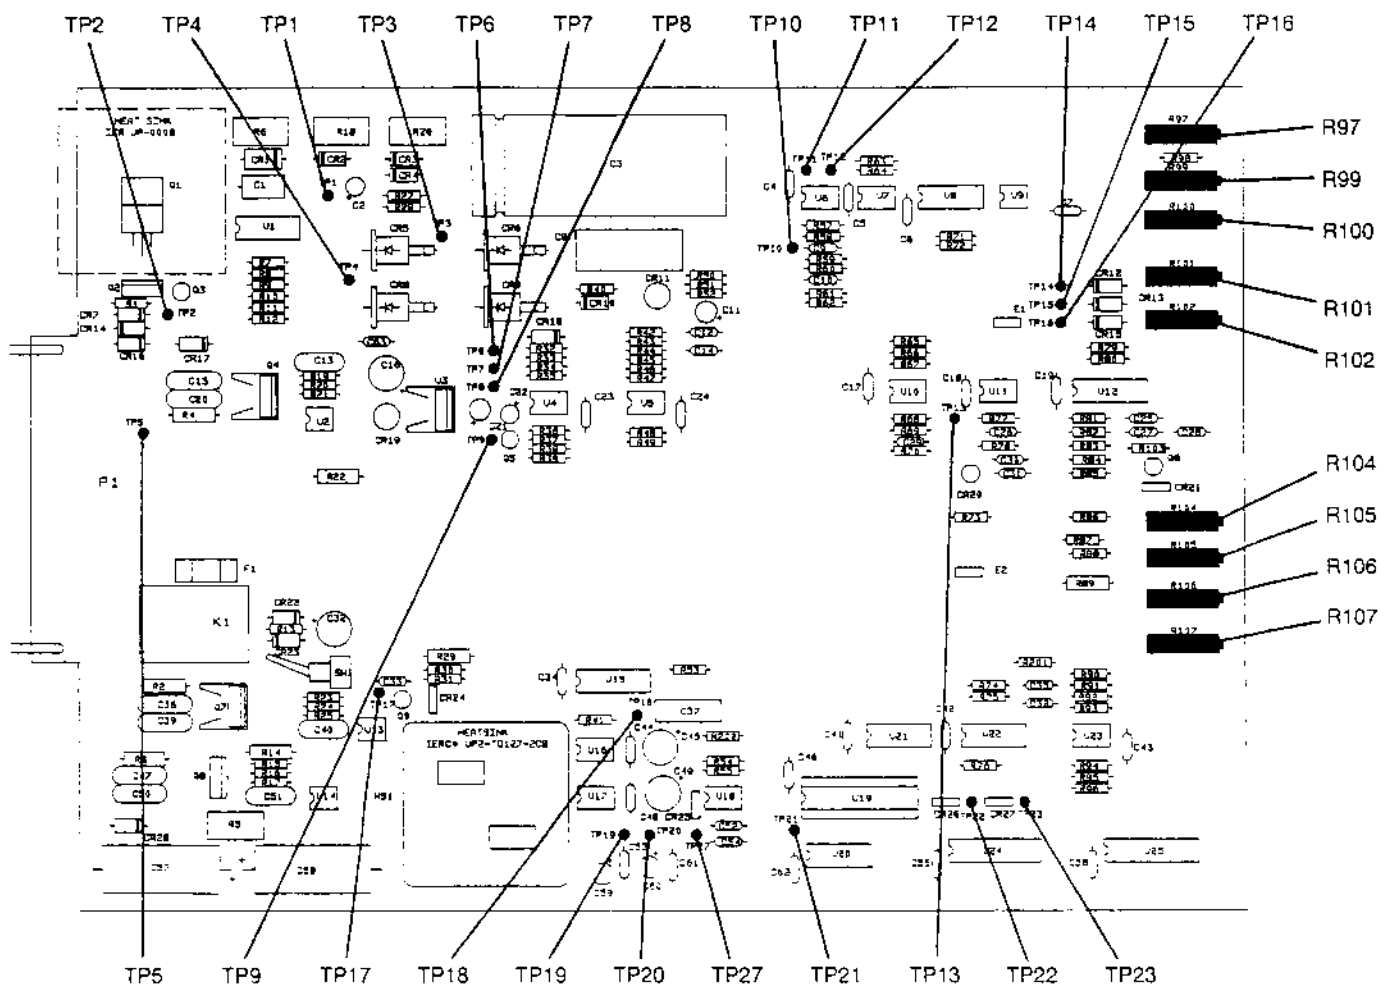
Test Point and Adjustment Locations for Controller P.C. Board Assembly, PN 74095 12987
